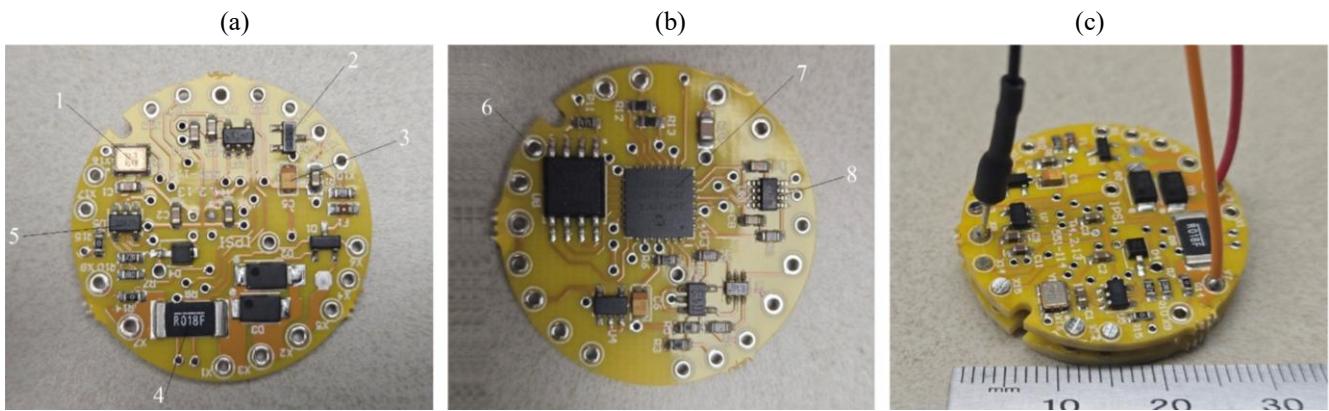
Controller board for recording vibration loads: (a) front side of the board; (b) bottom side of the board; (c) controller board mounting before testing; 1 – quartz resonator; 2 – triaxial accelerometer and angular rate sensor (accelerometer and gyroscope); 3 – chip capacitor; 4 – shunt resistor; 5 – linear voltage regulator; 6 – microcontroller (sensor data acquisition, processing control, and recording); 7 – non-volatile memory; 8 – analog signal conditioning module
